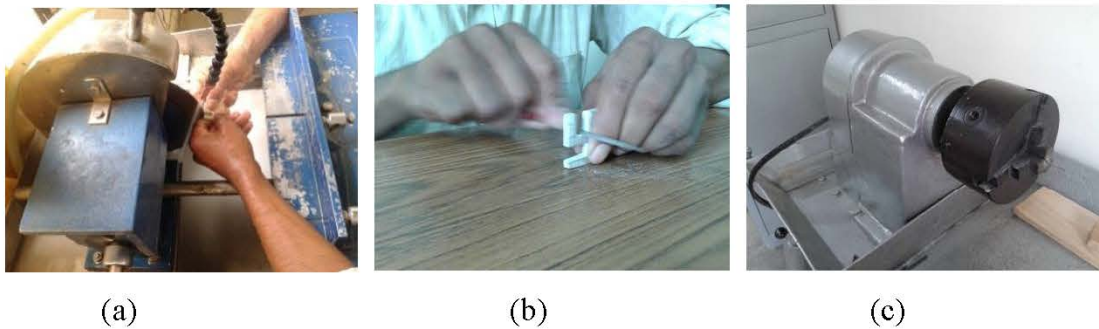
Fabrication machine: (a) Diamond cutter, (b) Diamond Filer, (c) Diamond Drill
